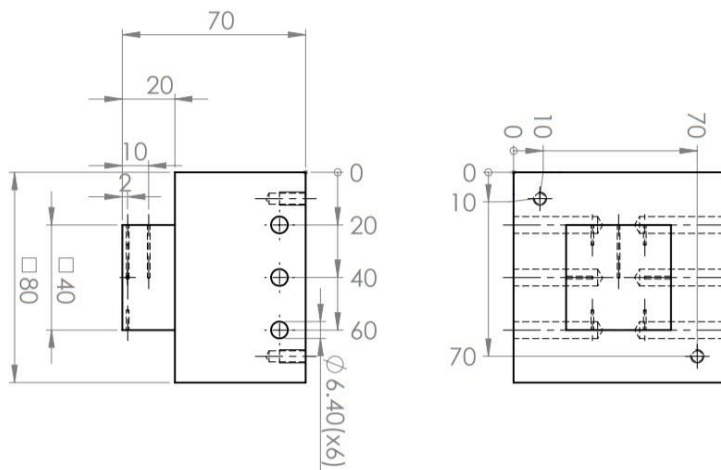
Technical drawing of the copper block used for heating the LTS. Sizes are in *mm*.
